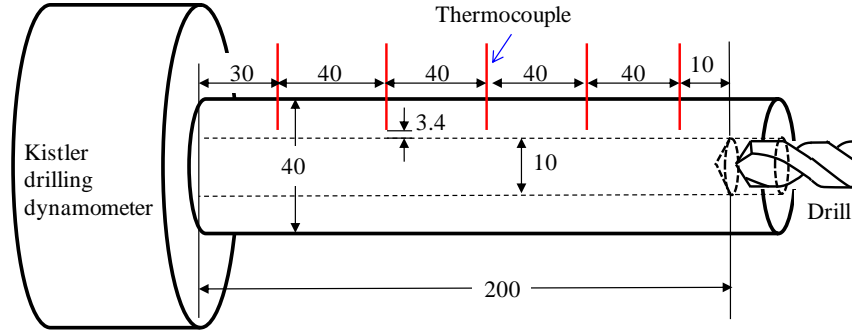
Experimental setup for MQL deep hole drilling (unit: mm)
